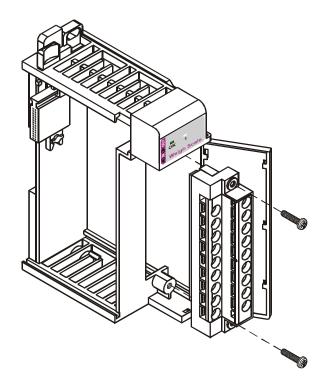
MODULE CONNECTOR REMOVED FOR EASIER CABLING
